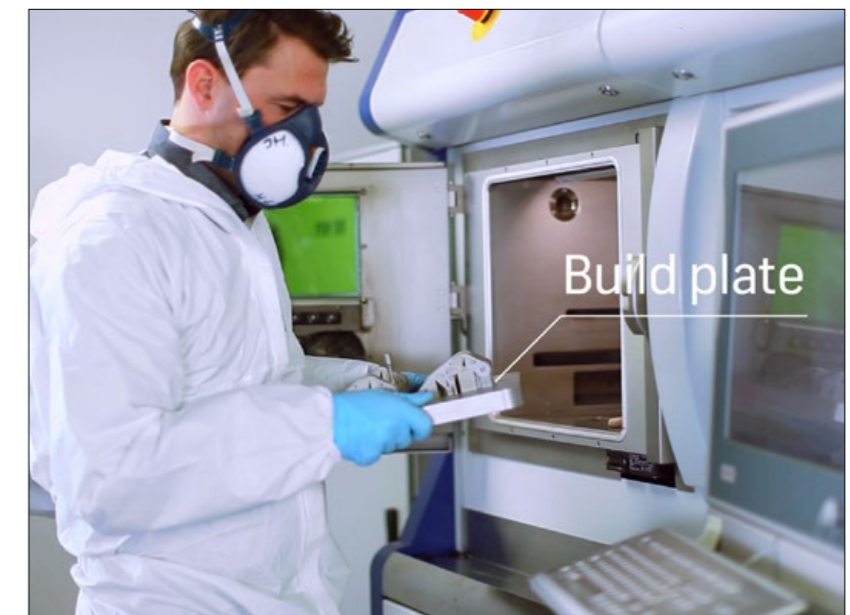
An AM part on the build plate being removed from a 3D printer (Courtesy Additive Industries/AddLab)
